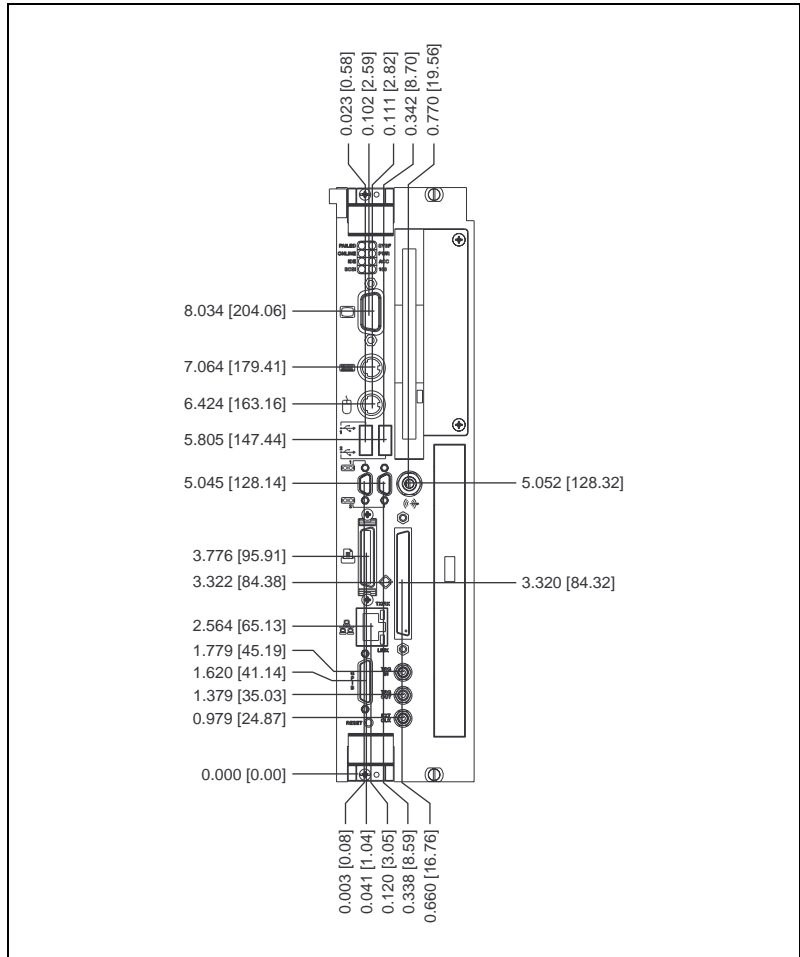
VXIpc 871 Front Panel Layout and Dimensions
